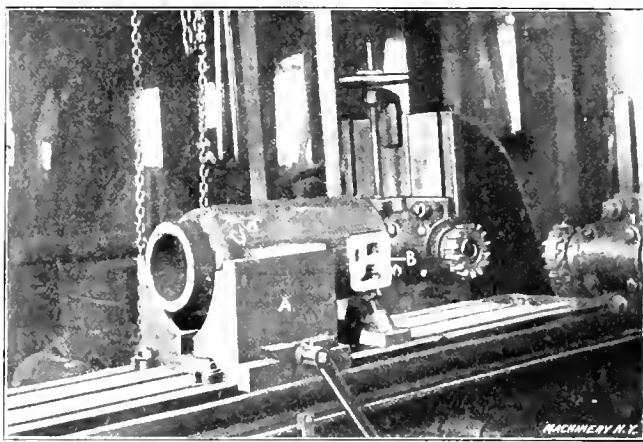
Surfacing Inlet and Exhaust Box Pads
